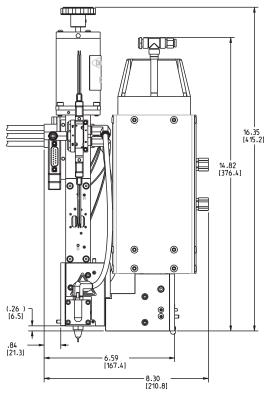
Therm-O-Flow Metering Valve Dimensions
